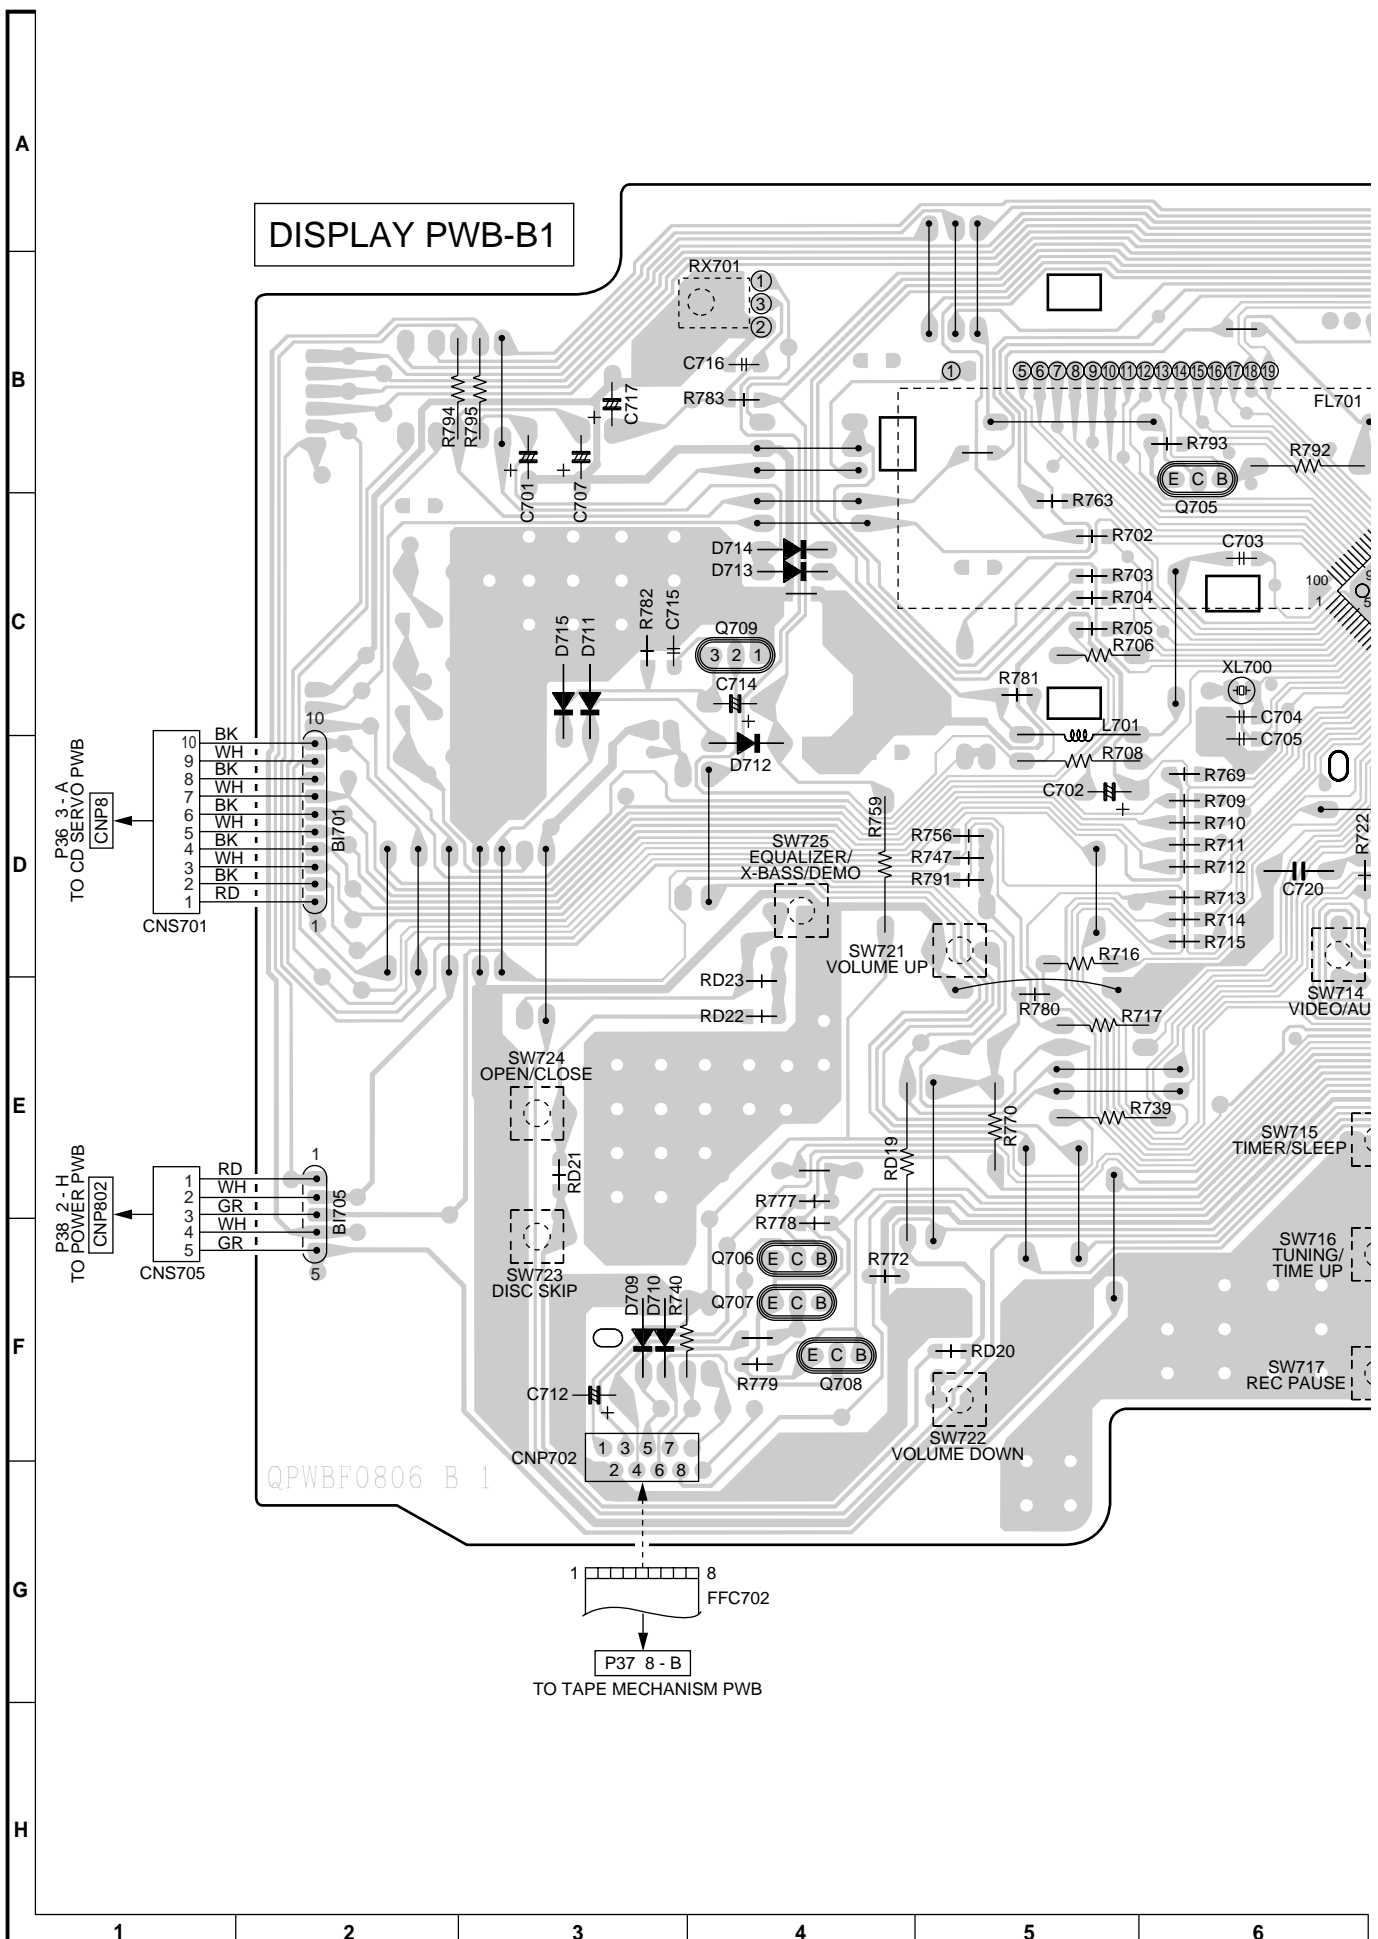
WIRING SIDE OF P.W.BOARD (3/7)
